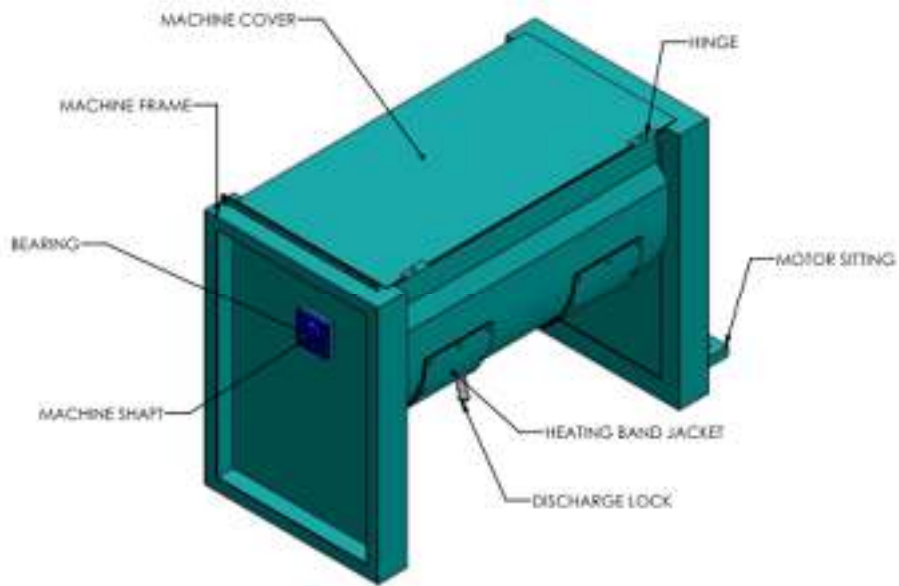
The Isometric View of the developed Plastic Pellets Drying Machine.
